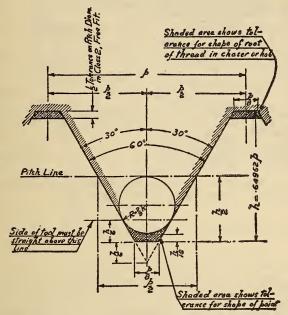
Shape for teeth of chaser or hob intended to trim crest of thread
